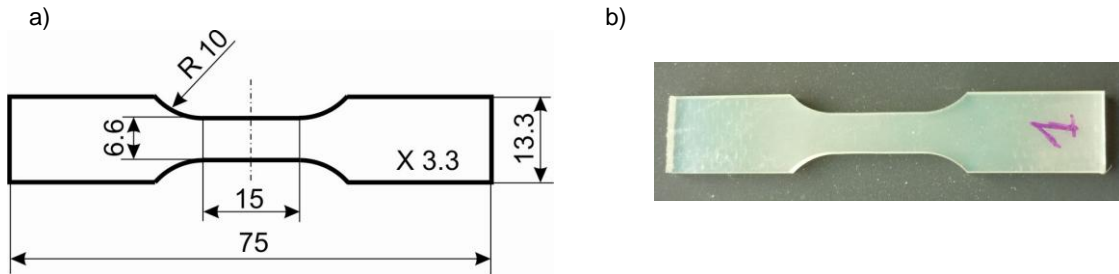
Technical drawing (a) and photograph (b) of PU-SMP specimen for tension test
